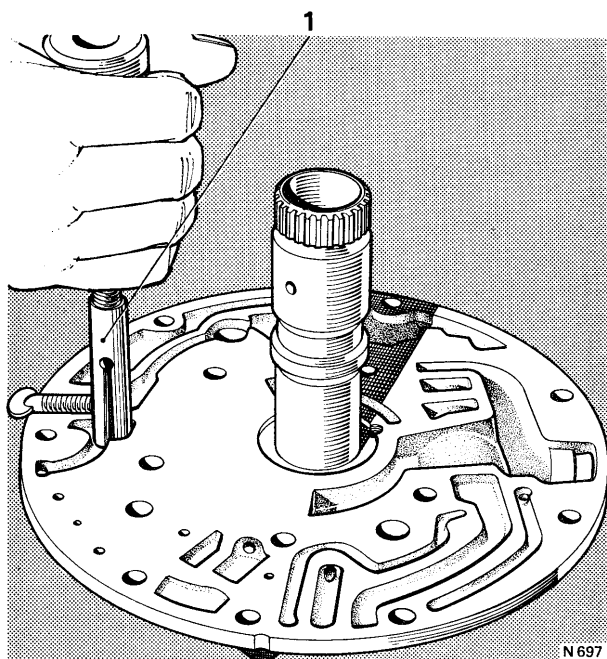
REMOVING THE BY-PASS VALVE SEAT
